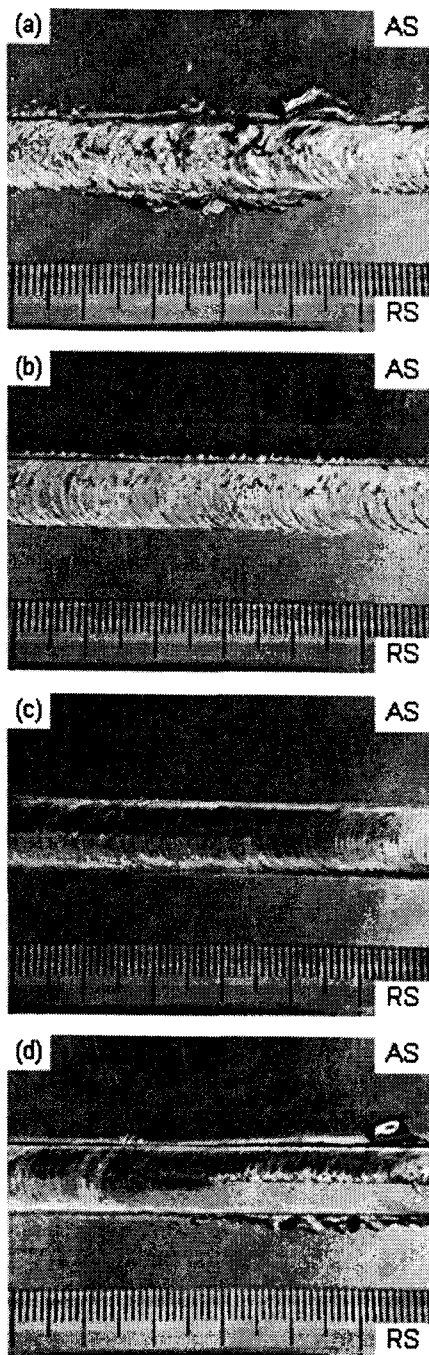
Appearances of specimens friction-stir-welded at a constant tool traverse speed of 300mm/min under various tool rotation speeds of (a) 800rpm, (b) 1000rpm and (c) 1400rpm and (d) 1600rpm.
